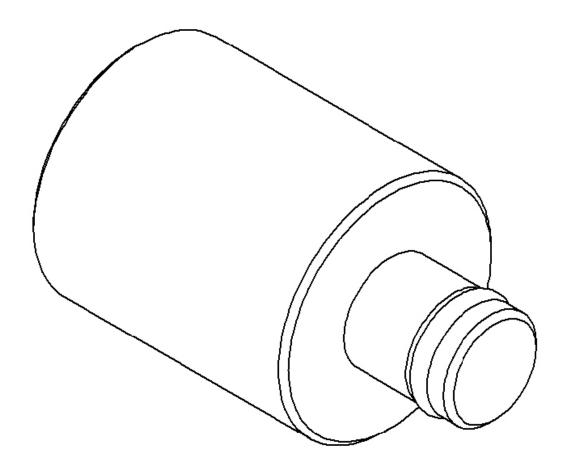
Crankshaft Damper Installer 8512 Courtesy of CHRYSLER LLC
